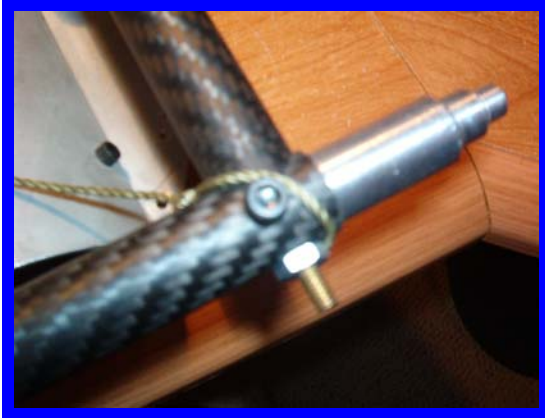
Front Arm Joint with Coping Detail, Set Screws, and Threaded Rod
